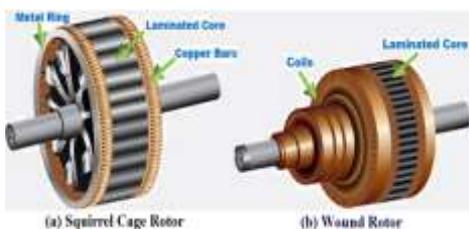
Types of AC IM: (a) Squirrel Cage Rotor, (b) Wound Rotor type
